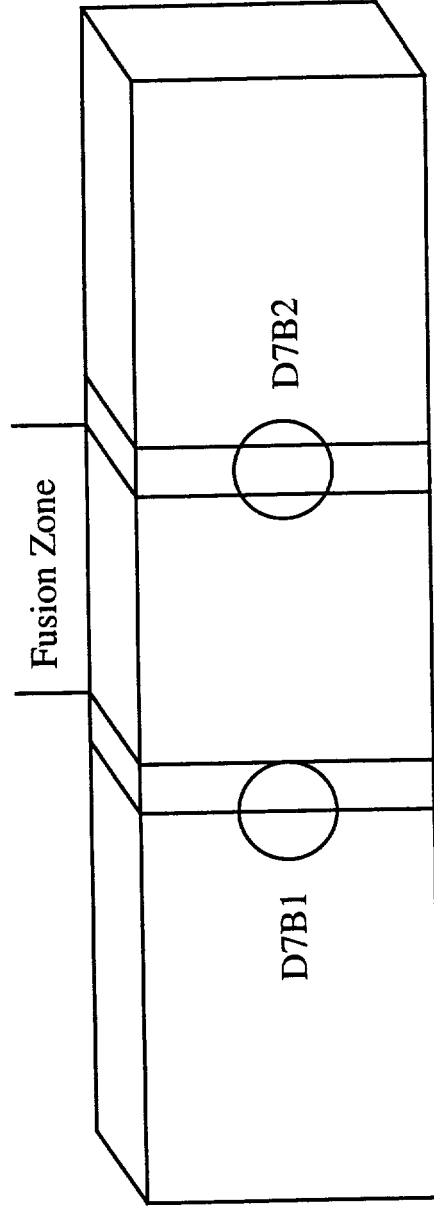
(e) Schematic Illustration of the Box Girder Section 1 and the Electroslag Welds Needed in the Fabrication of the Girder Section
